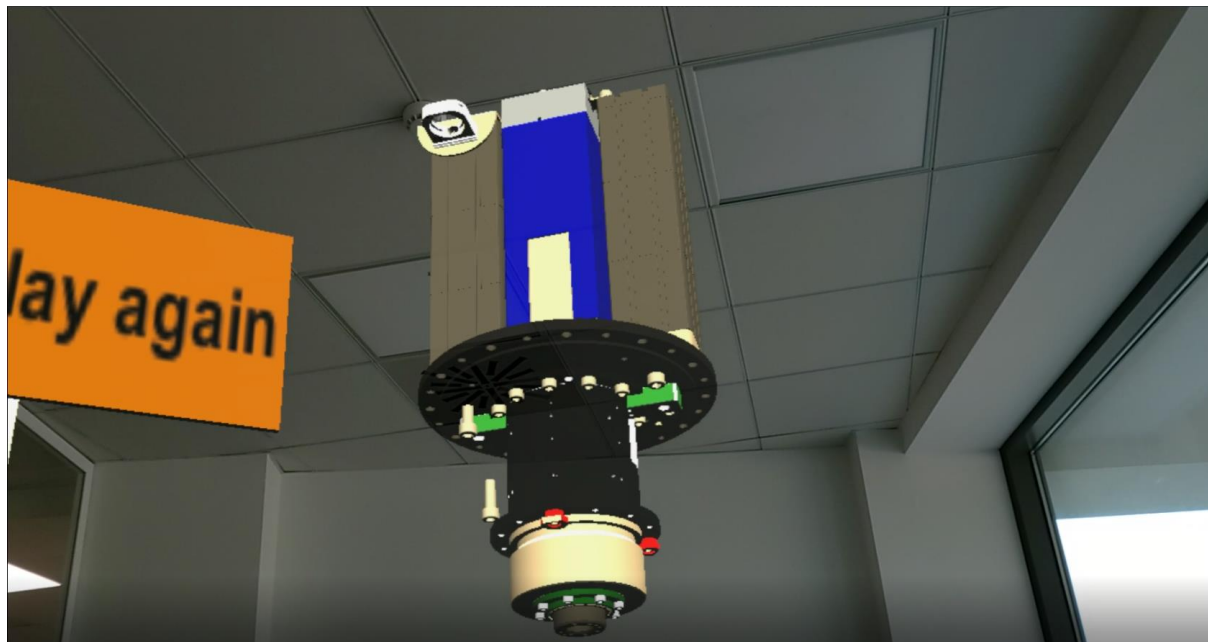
Snapshot of 3D model render for disassembly during drive unit exchange in the demo on AR glasses for the friction welding machine RSM401 of HWH
